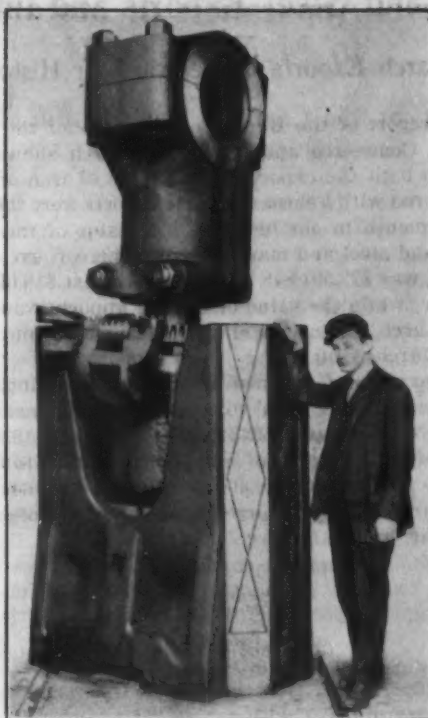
The Slide, the Pitman and the Pitman Screw Assembled. The Weight of These Three Parts Is About 39,000 Lb.
